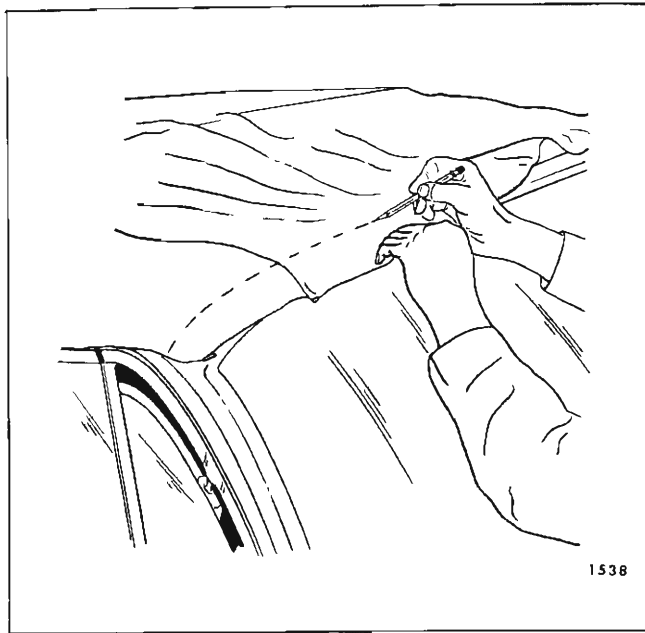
I-36 — Marking Top Material At Front Roof Rail
